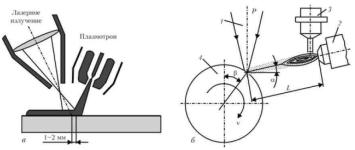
Schematics of powder laser-plasma coating processes using direct plasma torch (a) [10] and indirect plasma torch (b) (1 - radiation; 2 - plasma torch; 3 - powder container; 4 - sample; L)., a, b - distance and welding angles)
